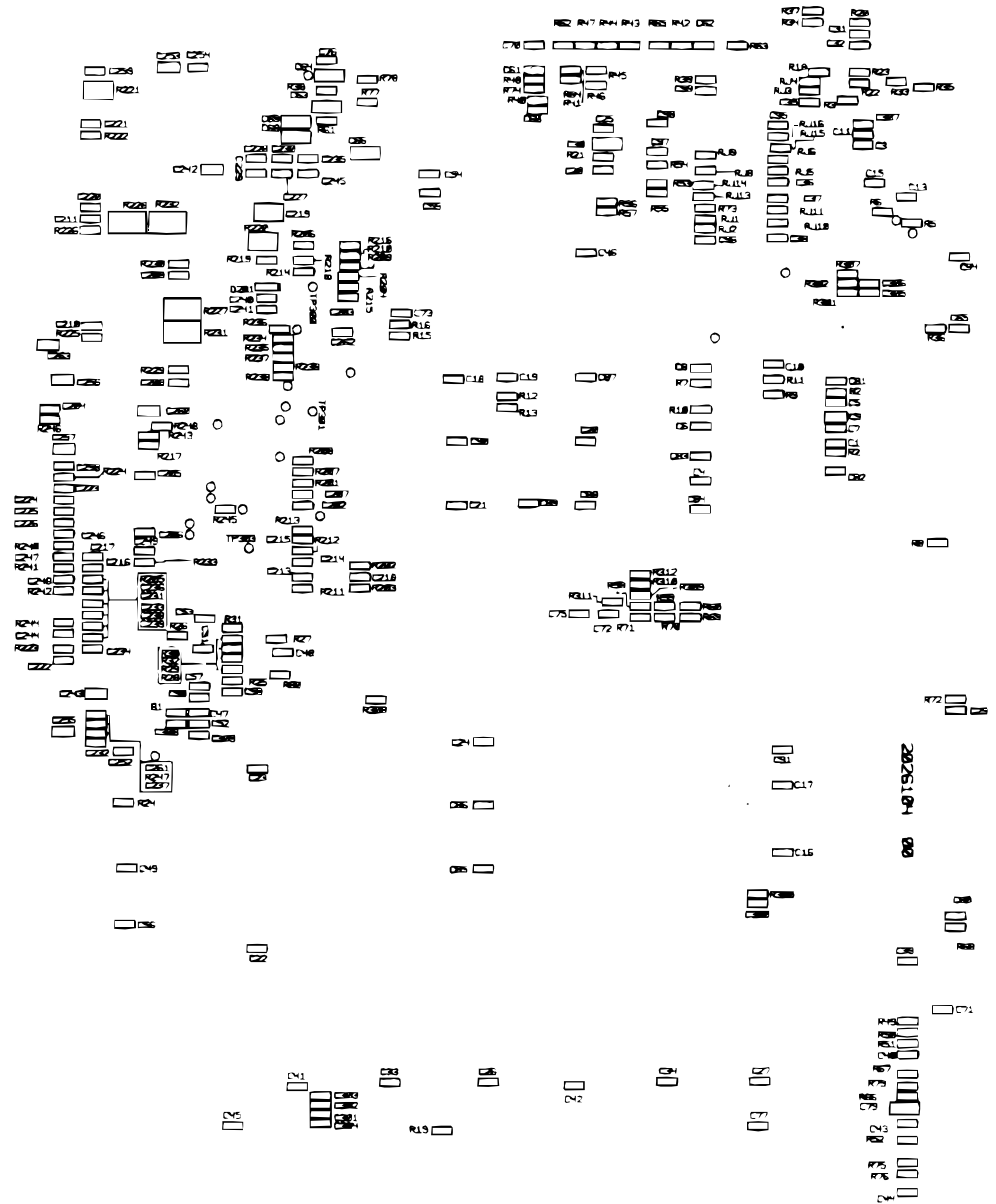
C234 Main Control Board Component Layout(Rear)
